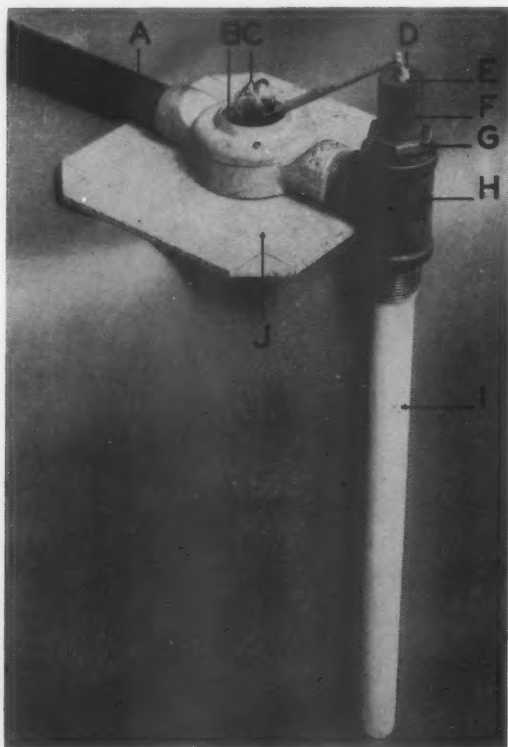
THERMOCOUPLE ASSEMBLY USED IN MEASURING TEMPERATURES OF MOLTEN CAST IRON. A, THERMOCOUPLE-HANDLE ENCLOSING EXTENSION LEADS; B, THERMOCOUPLE JUNCTION WITH EXTENSION LEADS; C, PLATINUM-PLATINUM RHODIUM THERMOCOUPLE WIRES; D, 2-HOLE PORCELAIN INSULATING TUBE; E, PORCELAIN TUBE; F, GRAPHITE TUBE; G, SPLIT LOCK NUT; H, PIPE TEE; I, REFRACTORY COATING APPLIED TO GRAPHITE TUBE; J, HEAT INSULATING PLATE.
